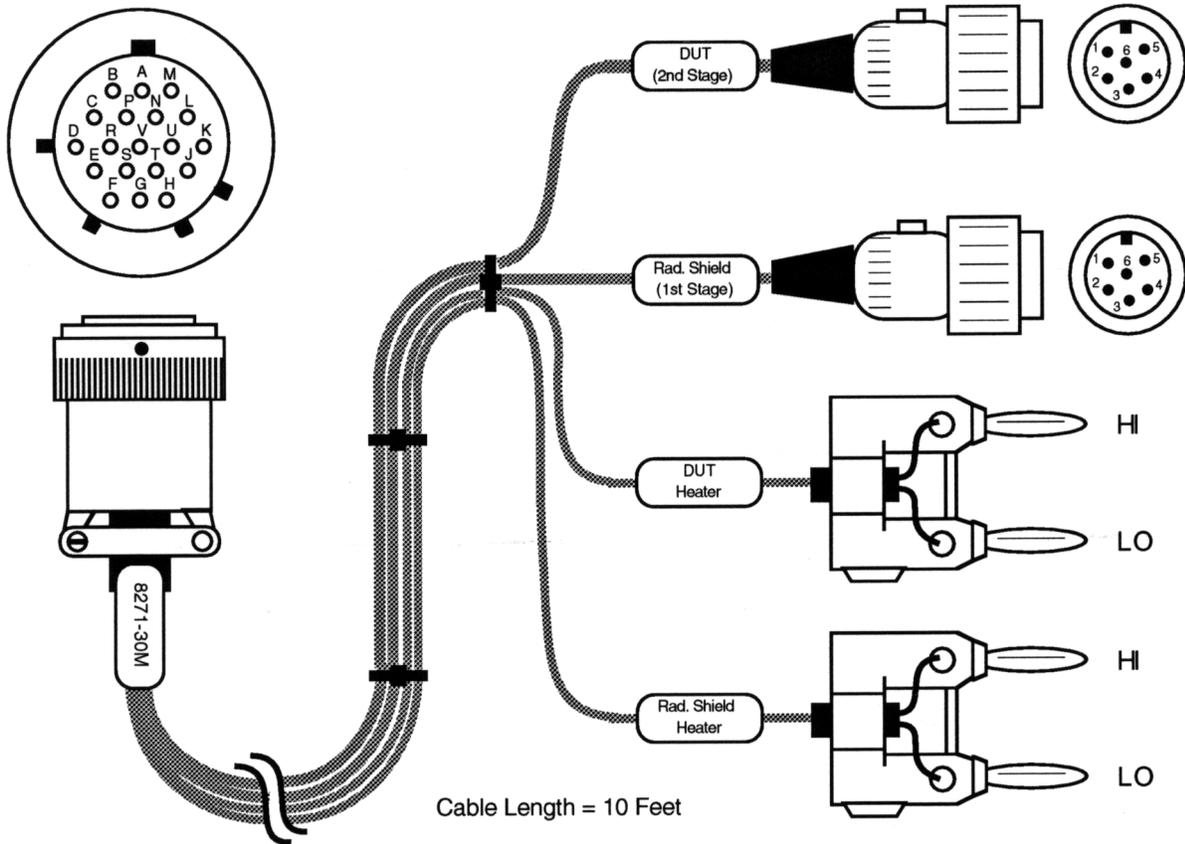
Definition of Model 8271-30M Cable Assembly
